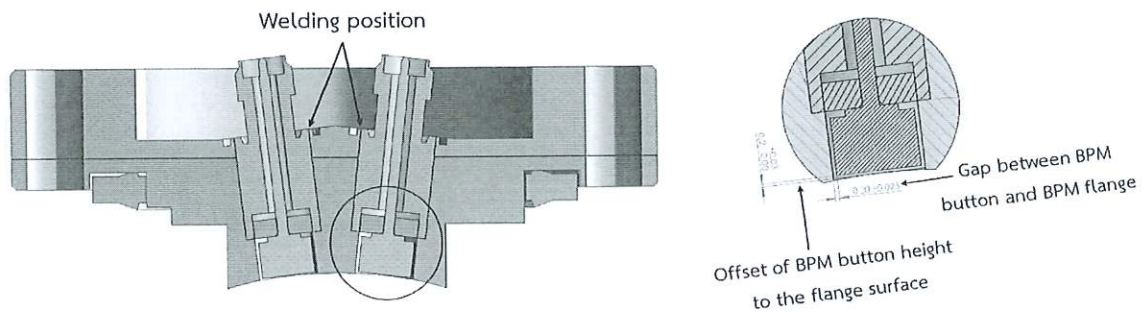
Cross section of BPM feedthrough assembled on the BPM flange
